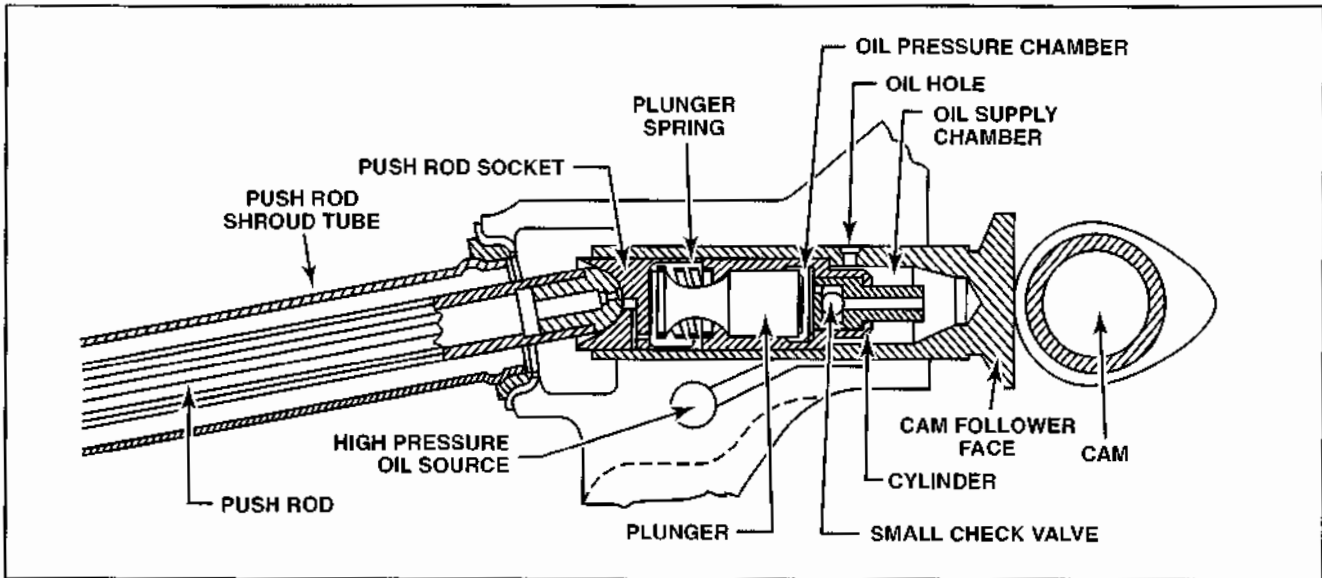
A typical hydraulic lifter consists of a push rod socket, a hydraulic plunger and spring, a check valve, a lifter body, and a cam follower face.
